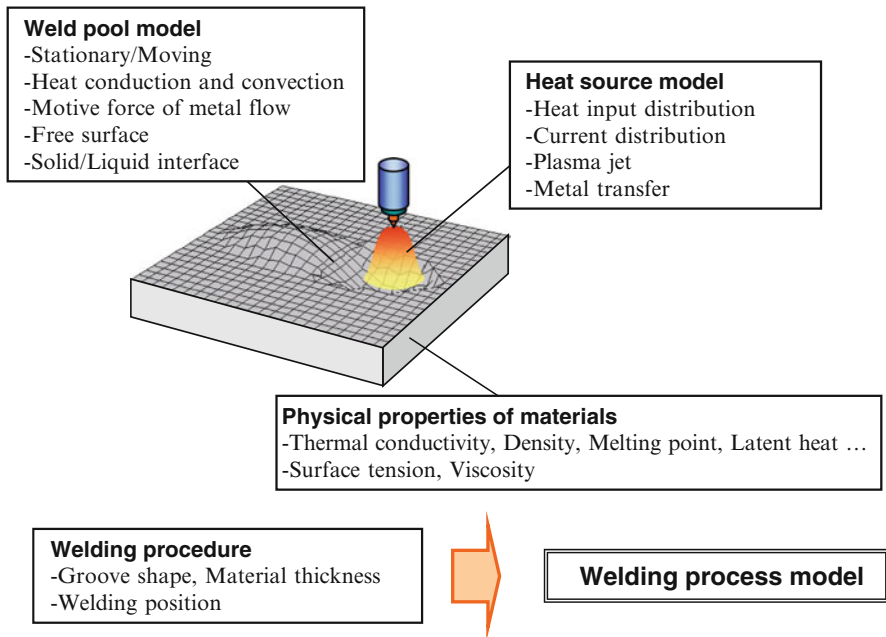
Technical issues affecting on welding phenomena which must be considered in the development of theoretical model
